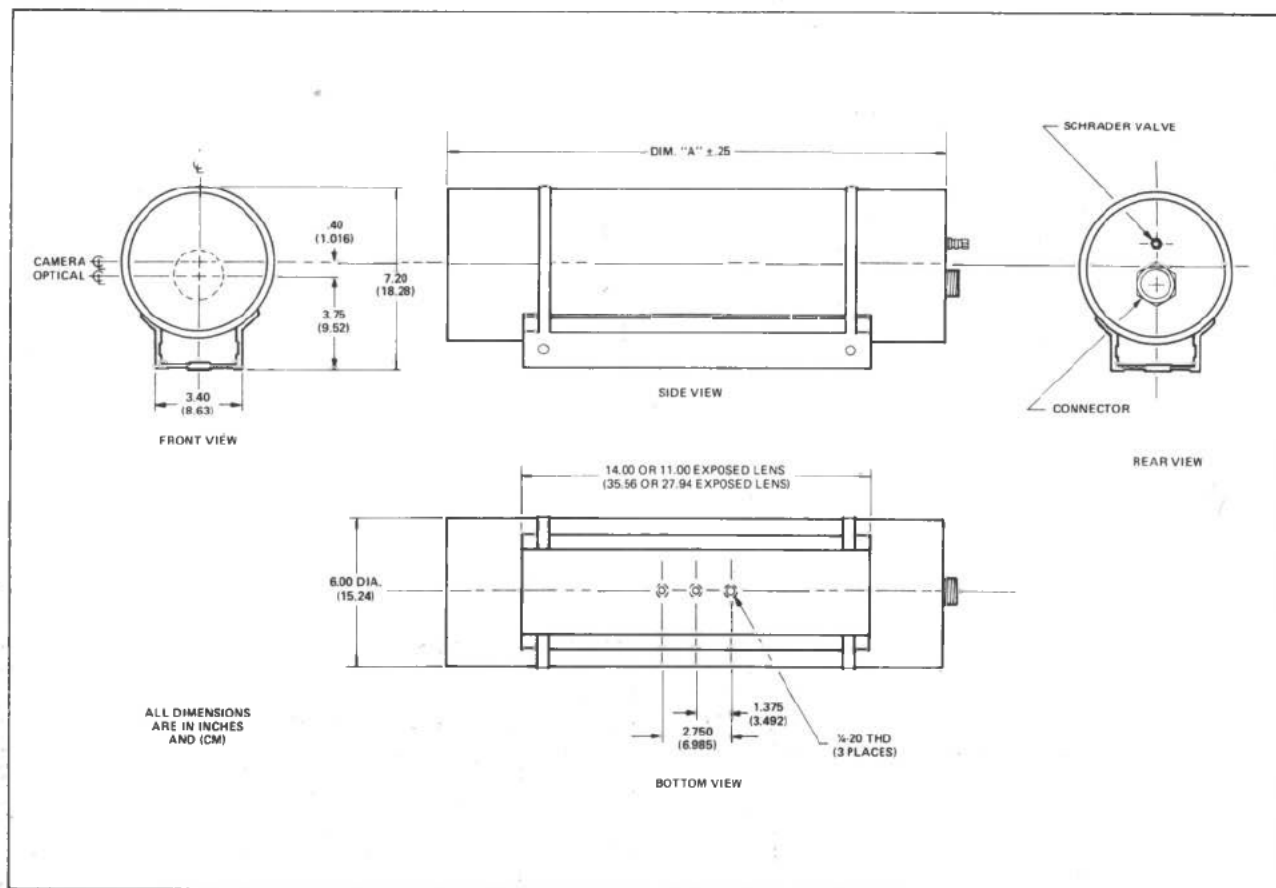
Physical Dimensions of 7210B Series Cameras
